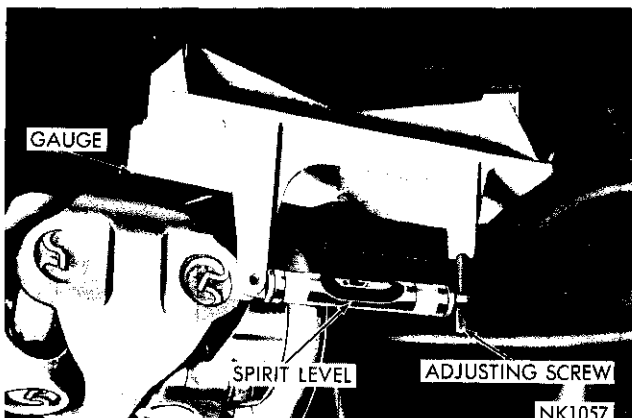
Measuring Rear Axle Angle AY-1 Models
